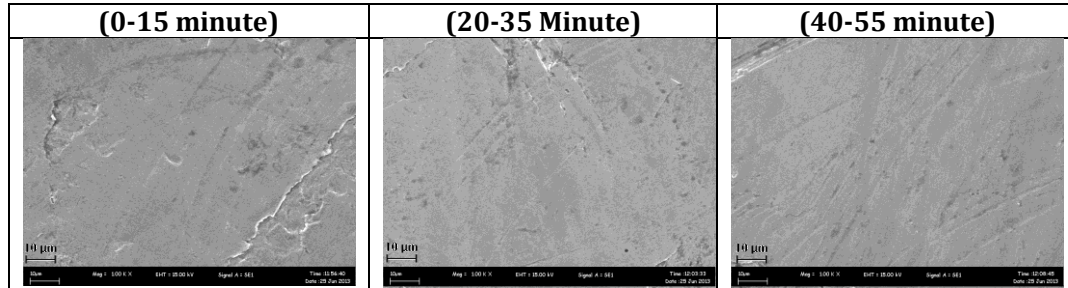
Surface profiles after machining FC300 at the cutting speed of 88 m/min.
